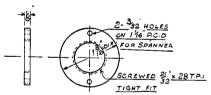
Nut for centre gear wheel (fixing plate end) M.S. 1 off.
